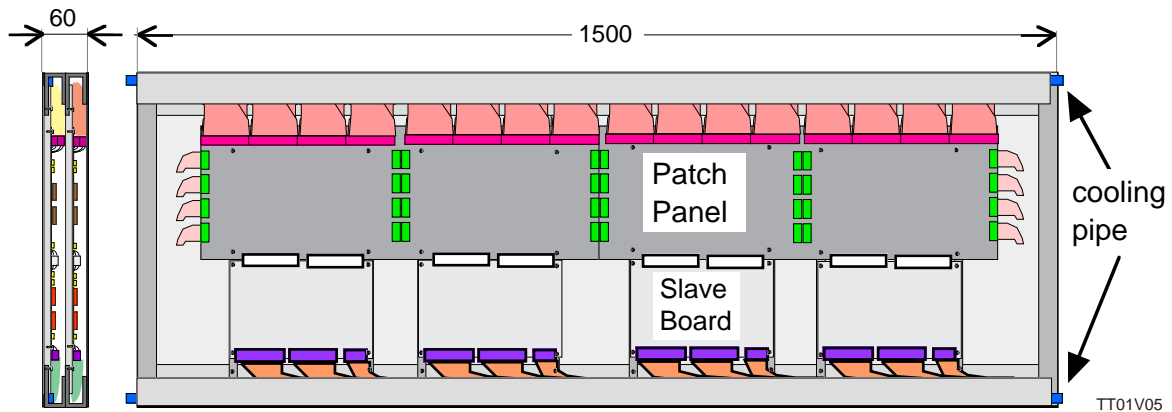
PS-Pack showing cooling arrangement and (left) the double circuit board layer structure.
